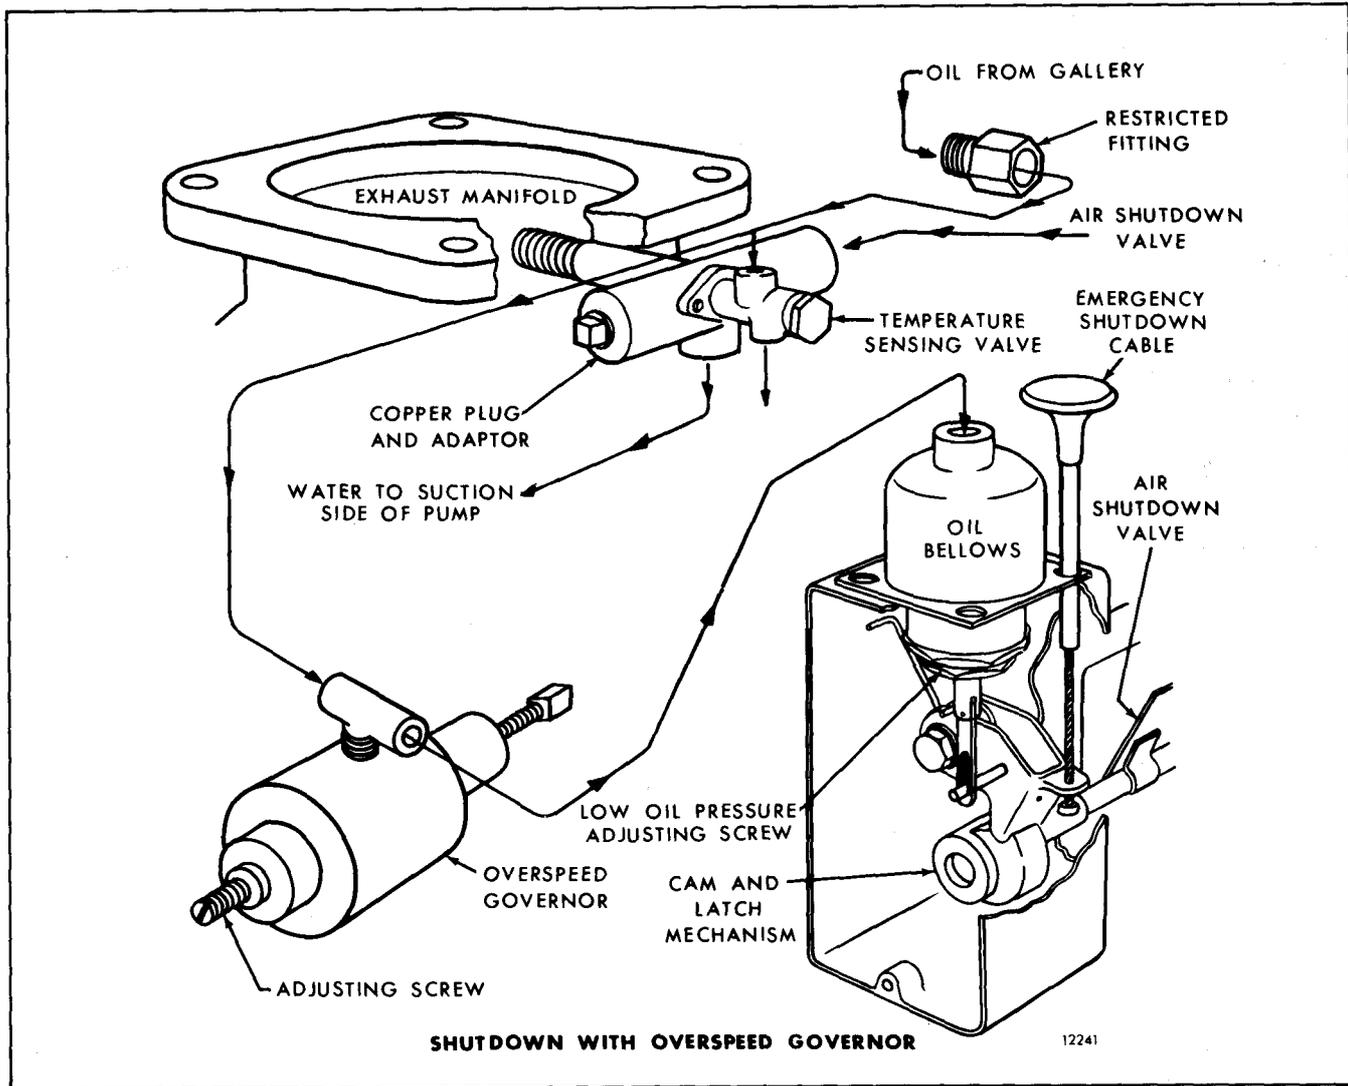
Schematic Drawing of Automatic Mechanical Shutdown System with Overspeed Governor
